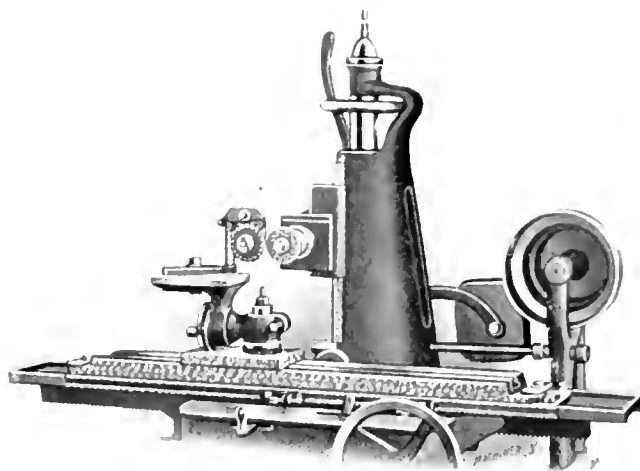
Cutter Grinding, with Universal Holder and Tooth Rest Stand
